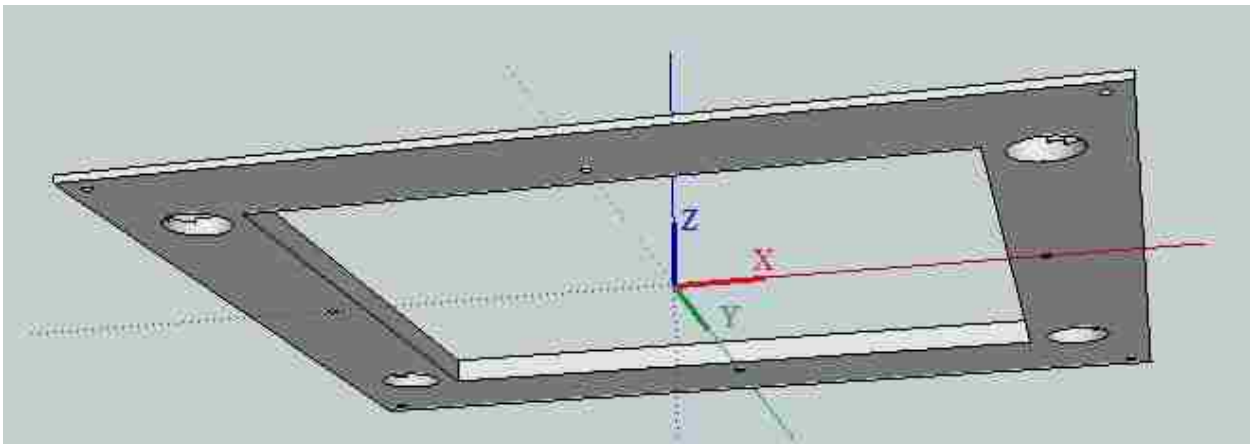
Bottom orthogonal view of the 20x20 cm² lower trimmer lead plate.
